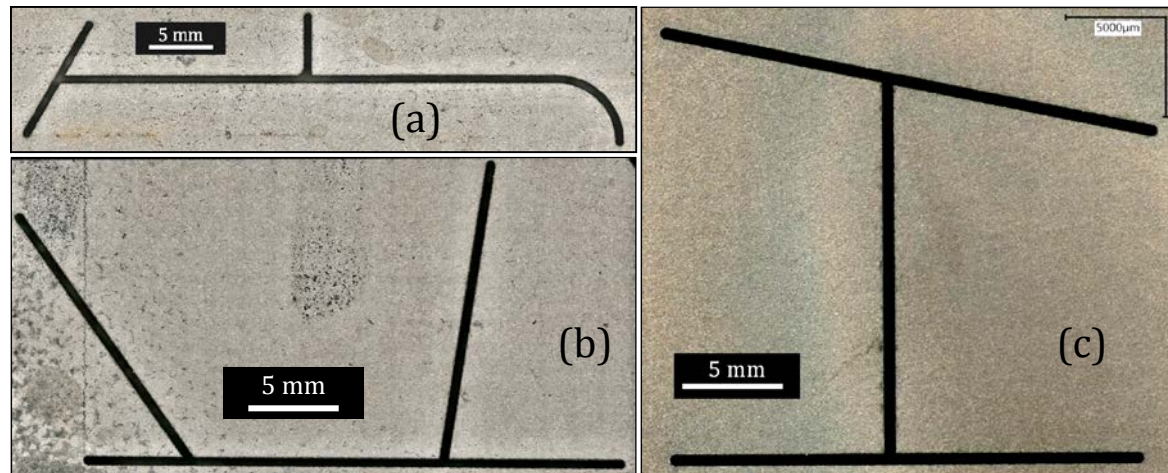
Examples of complex shaped slots machined using ODEM roughing and EDM shaping finishing in Inconel 718 (a, b) and γ -TiAl (TNM-B1) (c).
